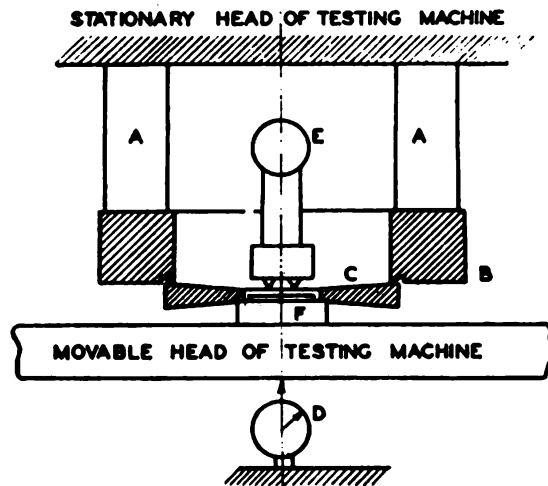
Arrangement for testing disk springs. A = steel cylinder, B = ring, C = disk spring, F = cylinder, E = extensometer, D = dial gage
